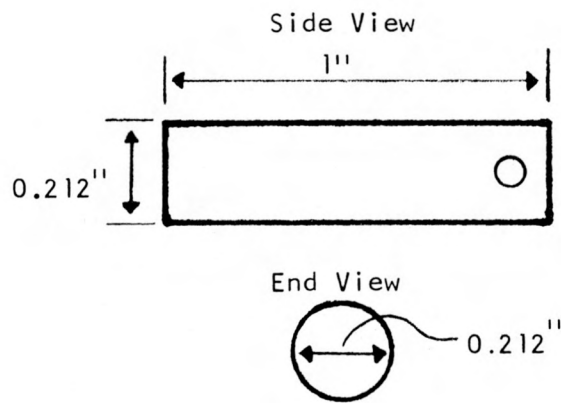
2 1/4 Cr-1 Mo Steel Corrosion Specimen.
